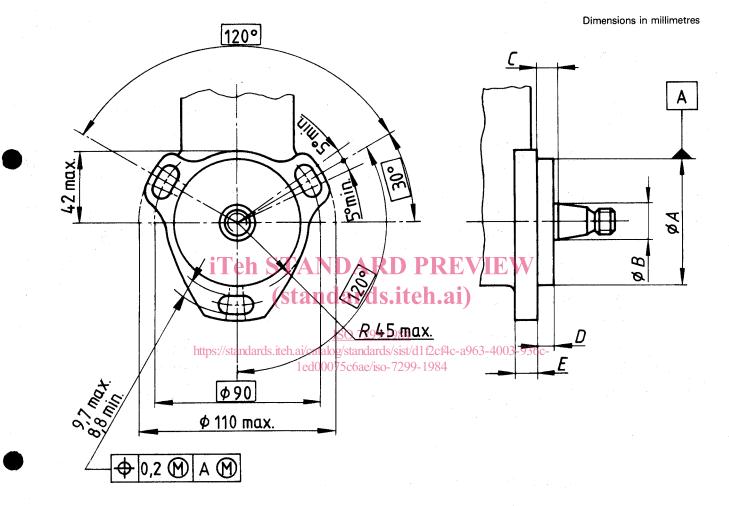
In-line fuel injection pumps — Type 4 end-mounting flange
